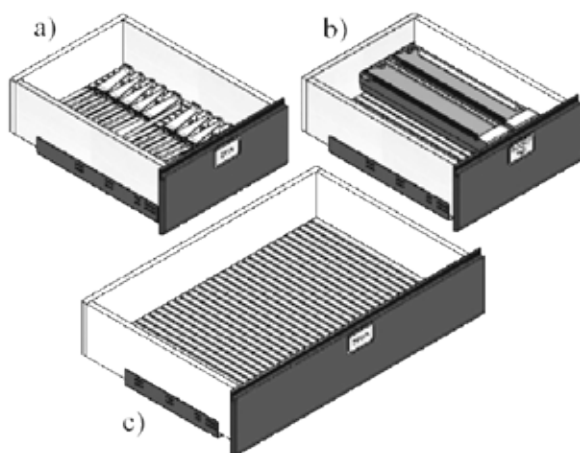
Middle drawers with fittings: a) a single drawer with knife holders, b) a single drawer with a foil cutter, c) a single drawer with anti-slipping mat
